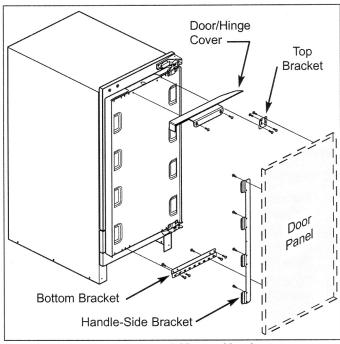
Panel Mount Hardware & Upper Door/Hinge Cover Removal
